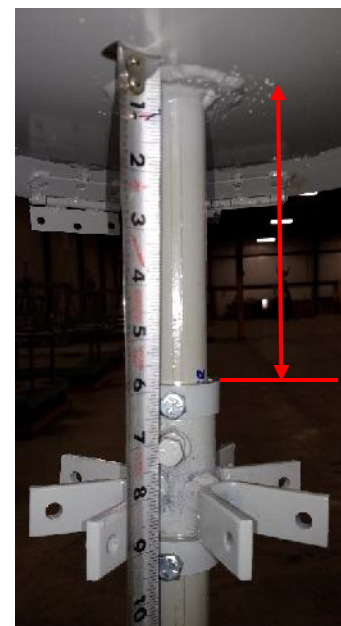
MEASUREMENT FROM THE BOTTOM CONE TO THE TOP SHAFT COLLAR
